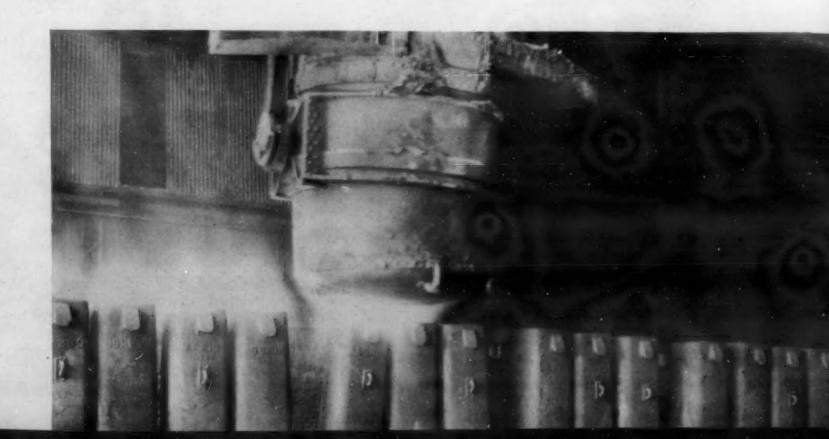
Pouring a Copper Cake in a Water-Cooled Mold.
